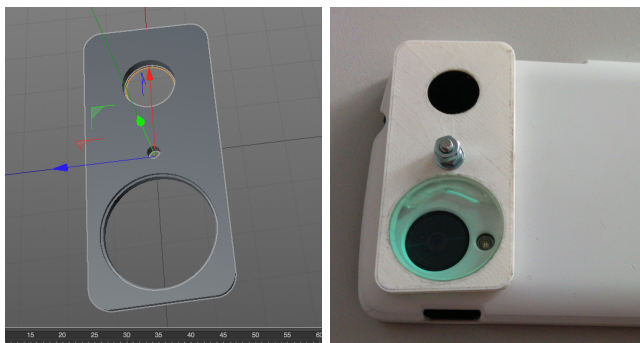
3D model of the lens holder (left), already printed lens holder with installed lenses/filters (right).
